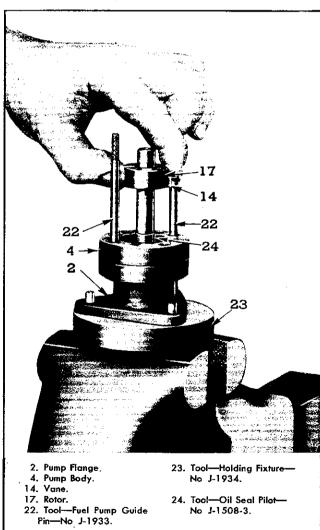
Installing Rotor Shaft Through Oil Seal in Pump Flange with Tools J-1508-3, J-1933 and J-1934.
